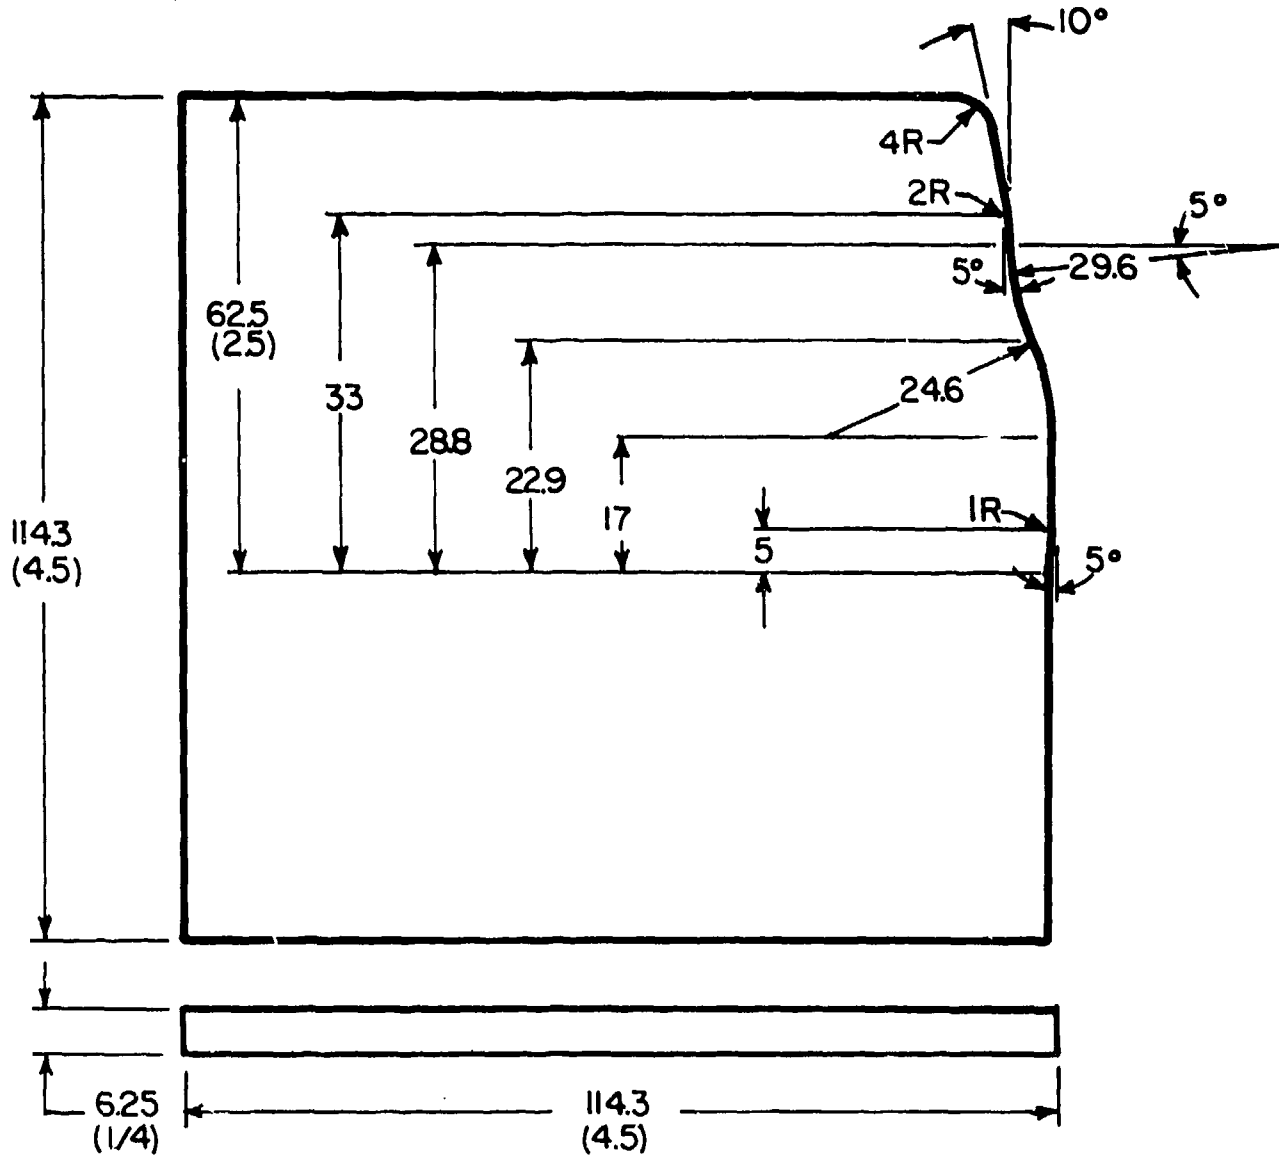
Sketch of template for hot drawing with double curvature die (final draw).
